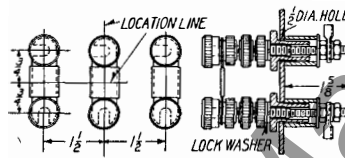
CURRENT COIL TERMINALS FOR STEEL PANEL MOUNTING
